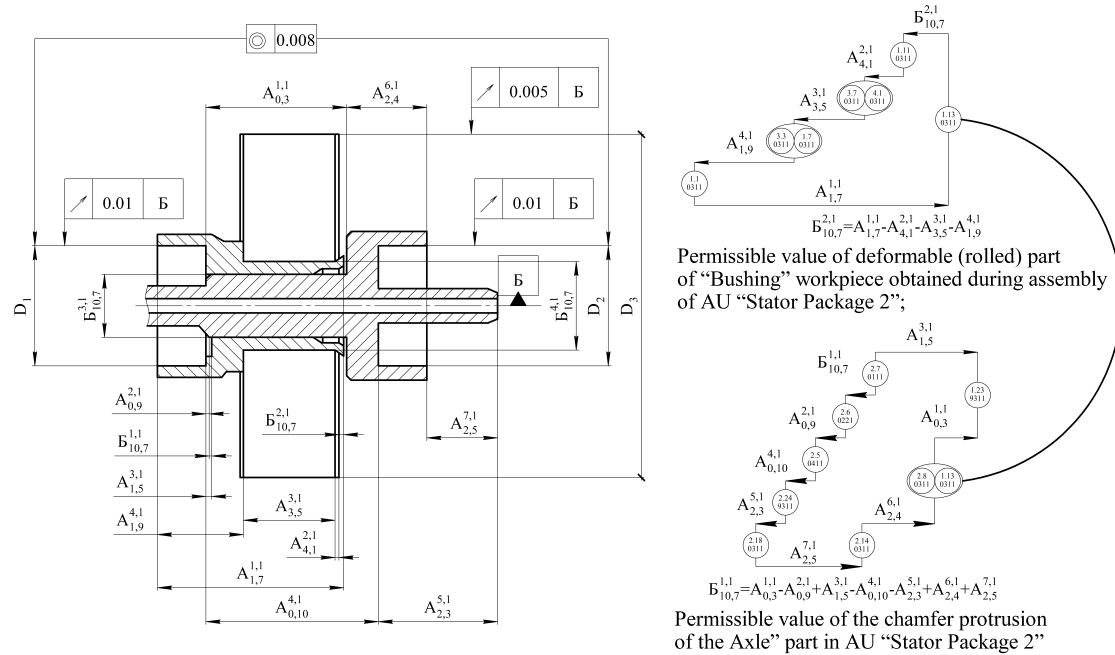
Requirements for assembly of AU “Stator Package 2” with indication of surfaces between which the corresponding chain links are located
